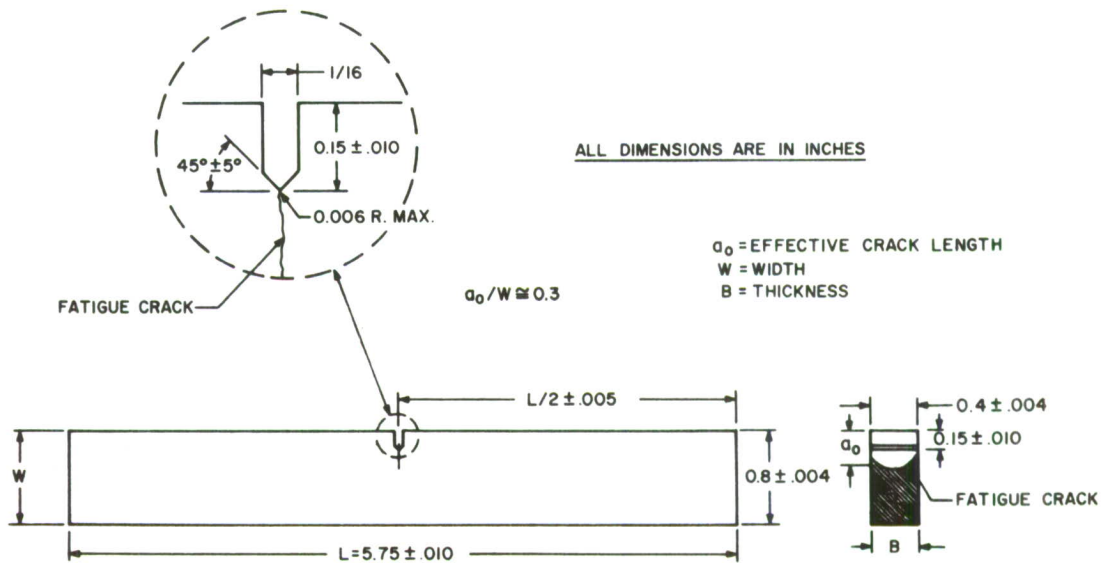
Four Point Loading Slow Bend Specimen Configuration
